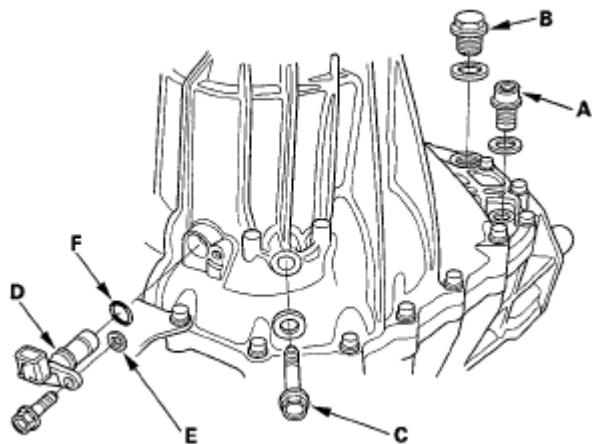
Identifying Drain Plug, Filler Plug, And Flange Bolt
